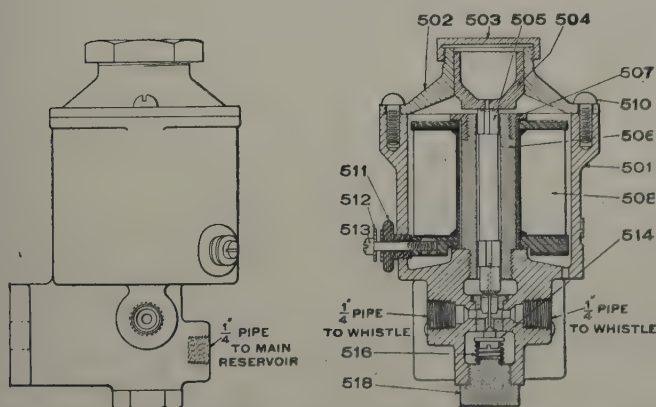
Type A Combined Magnet and Bracket for Electro-Pneumatic Signal System.
